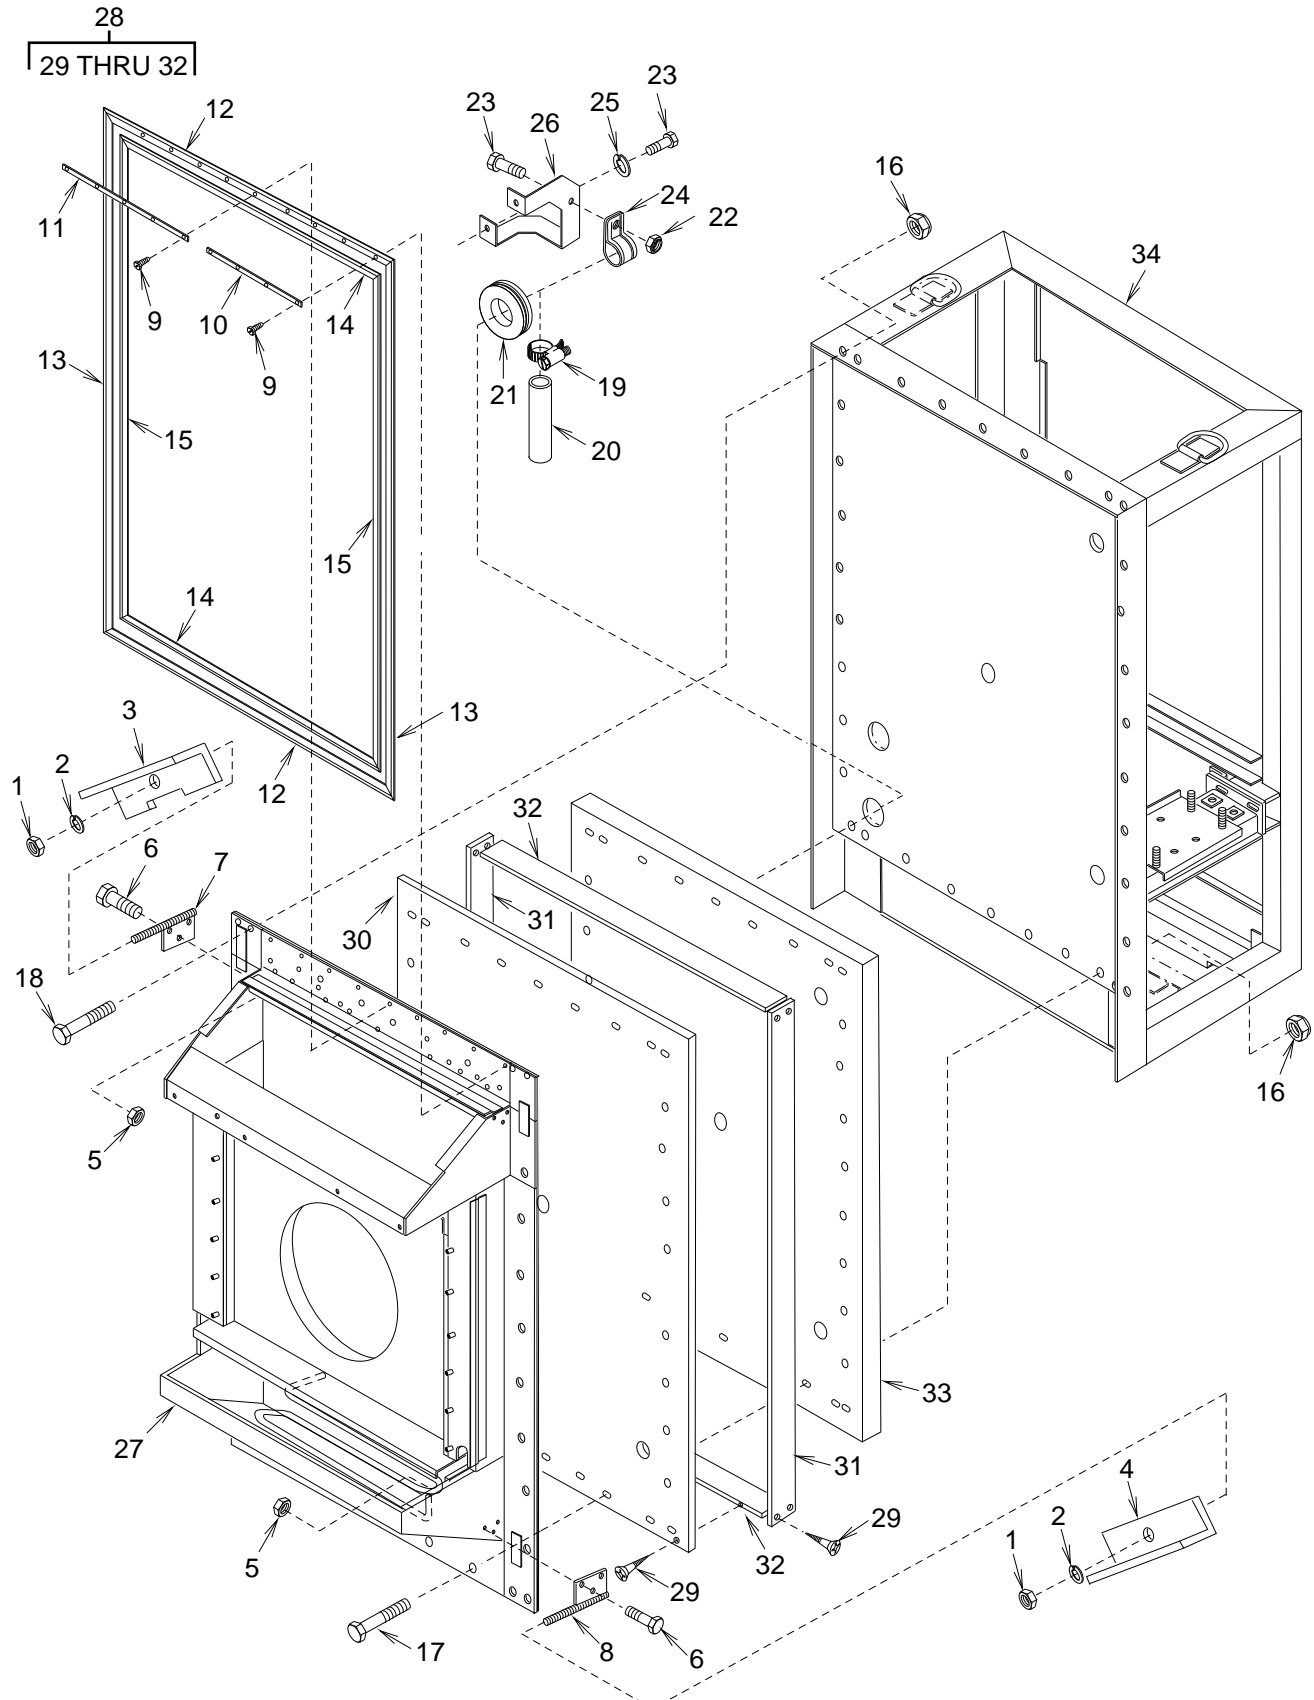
Heat Shield, Evaporator Housing, and Condenser Frame
